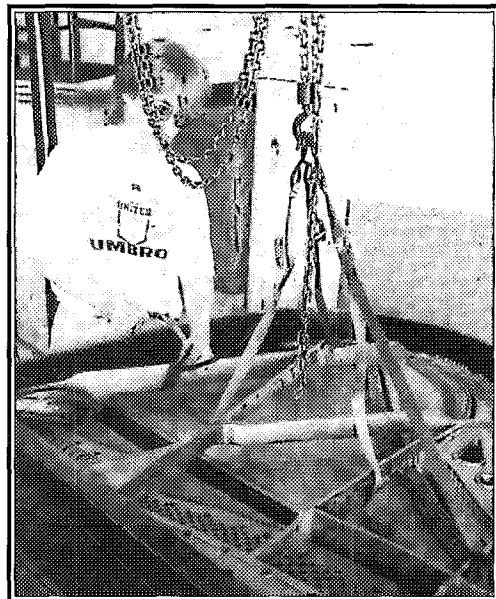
Attaching the nylon cinch straps to the plate struts.
